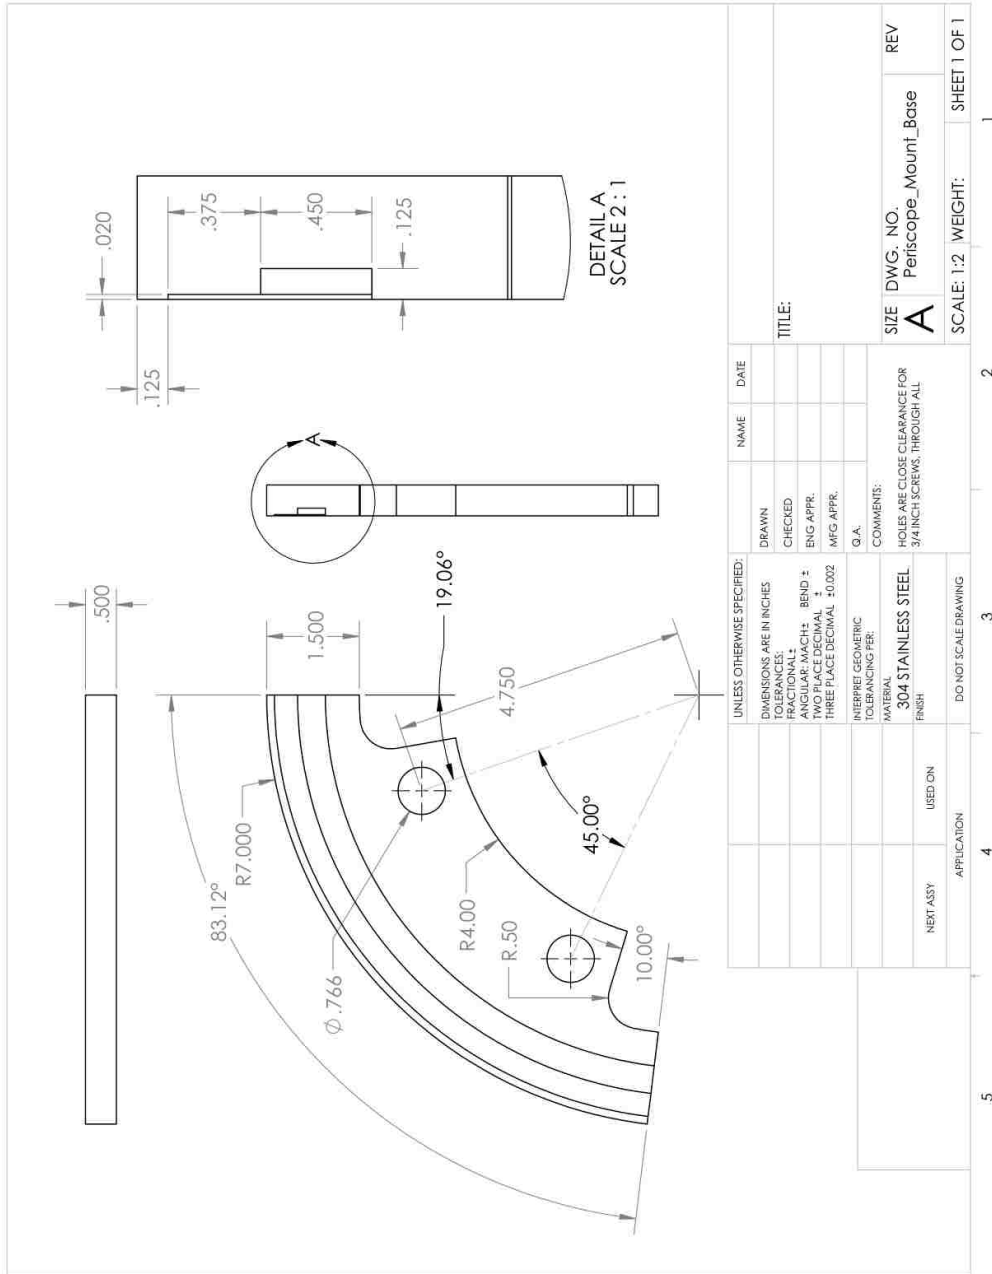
Drawing of the base for the periscope mount. This part was silver plated to reduce surface friction.
